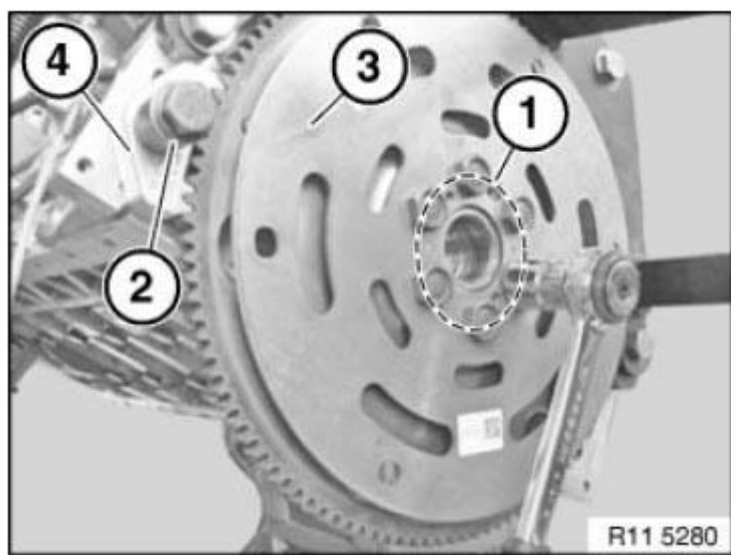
Installing Flywheel Using Special Tool (11 9 260)
